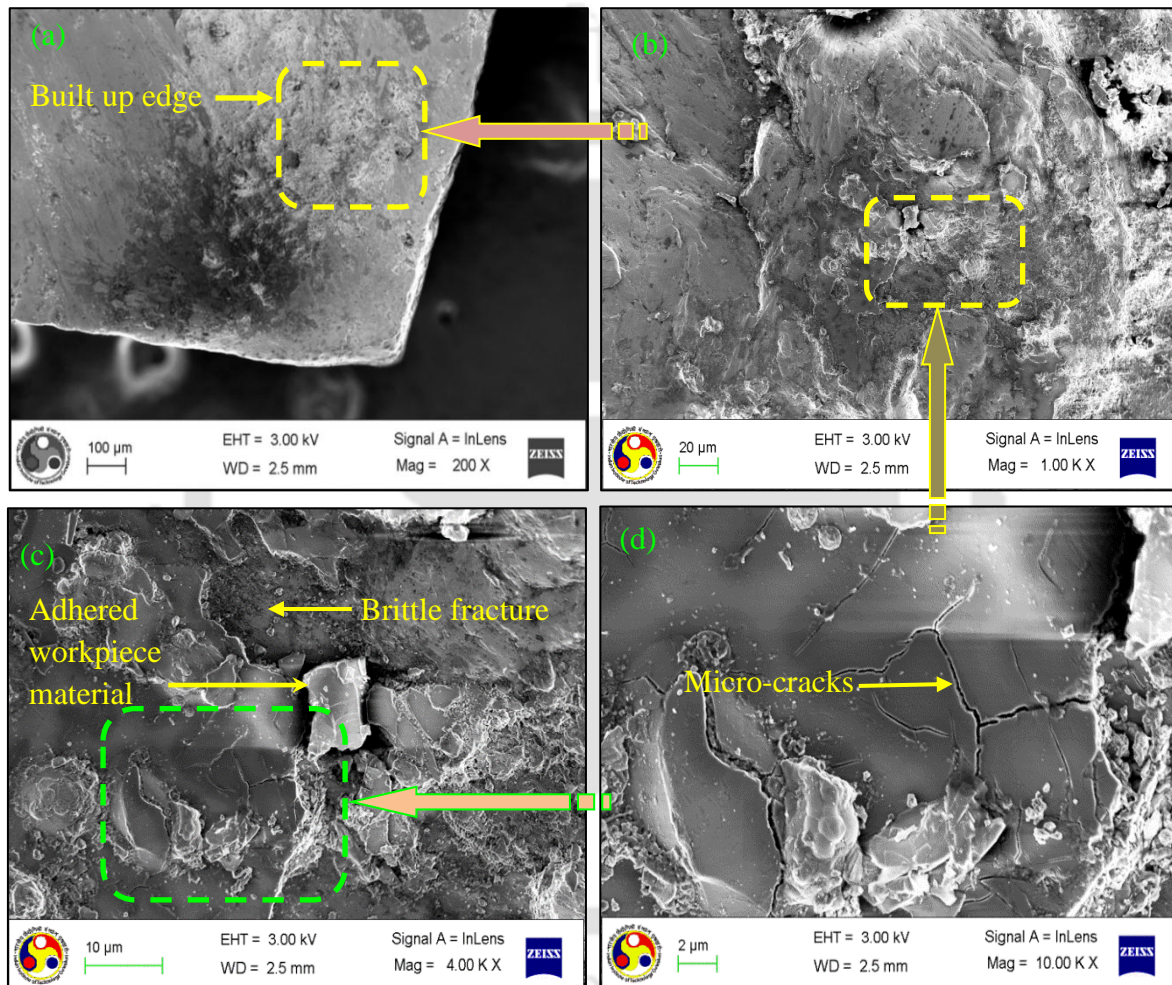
Surface morphology of (a) un-textured tool having built up edge on the rake surface, (b) magnified view of build-up edge, (c) brittle fracture and adhered workpiece material on the rake surface and (d) micro-cracks present on the rake surface of the cutting tool
